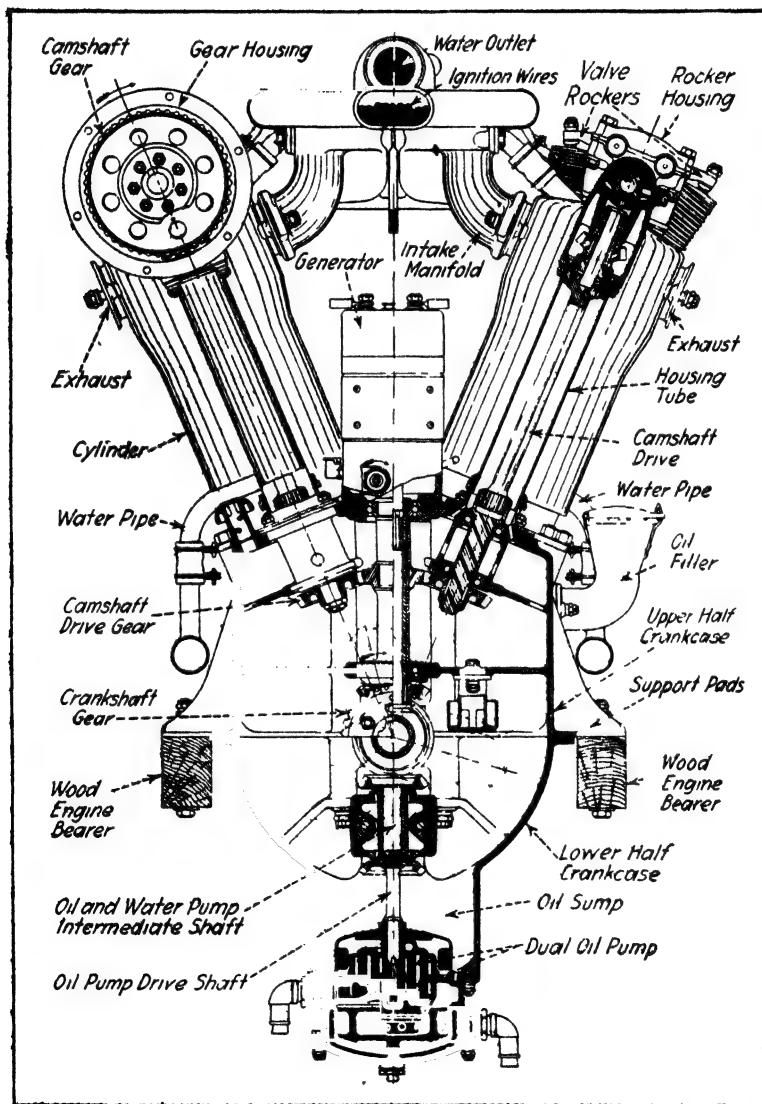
Views Showing Construction of the Liberty Aviation Engine. Note Method of Oil Pump and Camshaft Drive.
